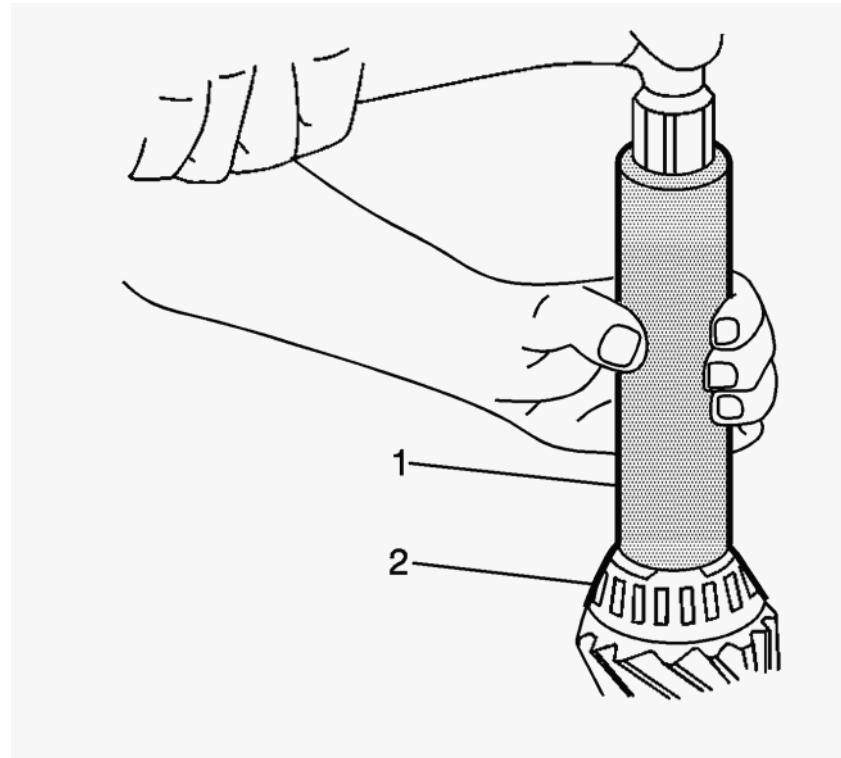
Installing Inner Pinion Bearing Onto Pinion Gear
